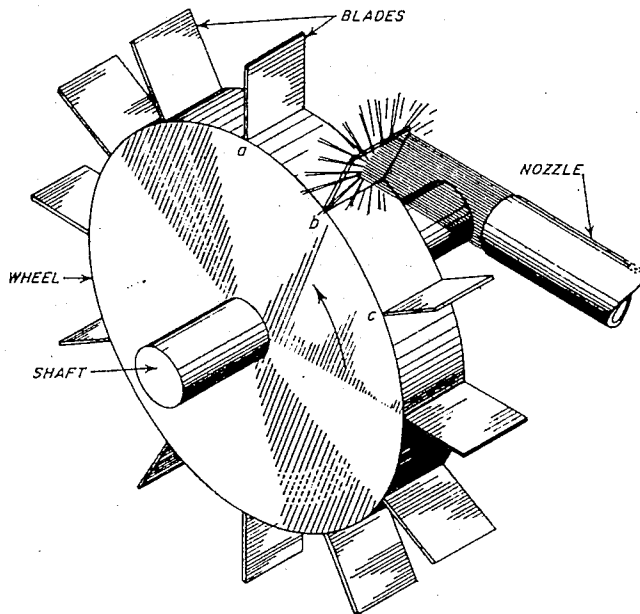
Crude steam turbine has flat blades on wheel perimeter. Steam flowing from nozzle exerts force on blades, making wheel turn.
